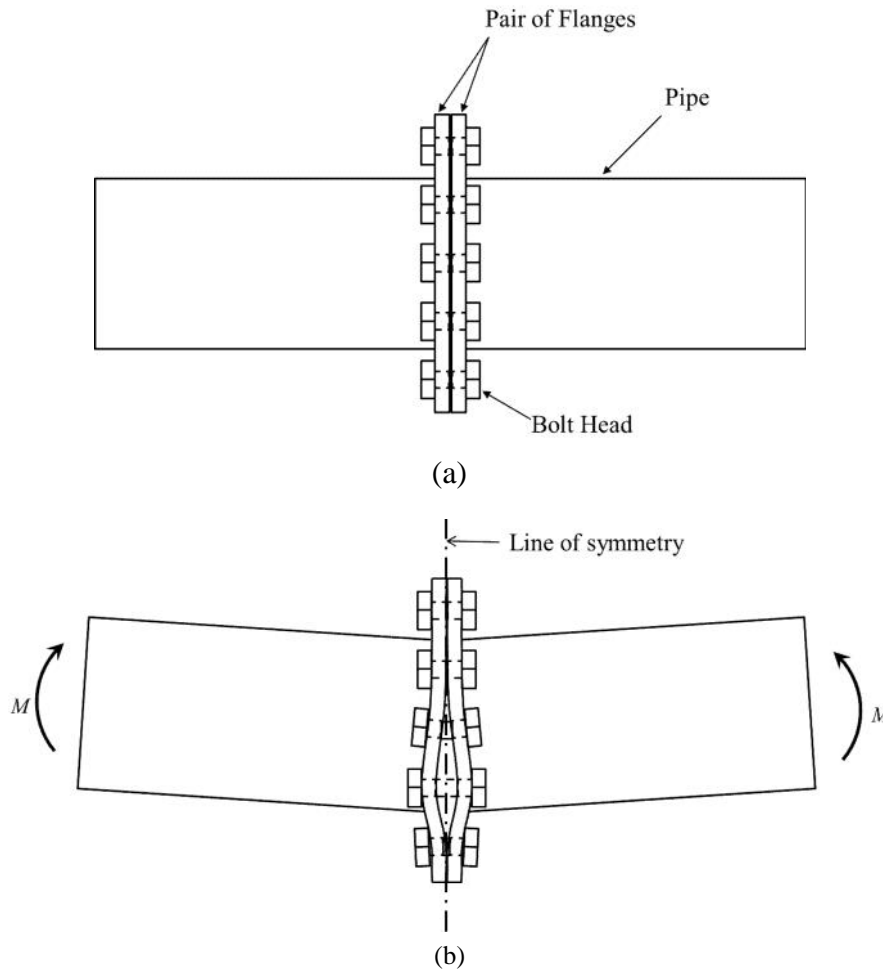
(a) Front view of a typical bolted flanged pipe joint (b) Deflected shape of flanged pipe joint subjected to bending
